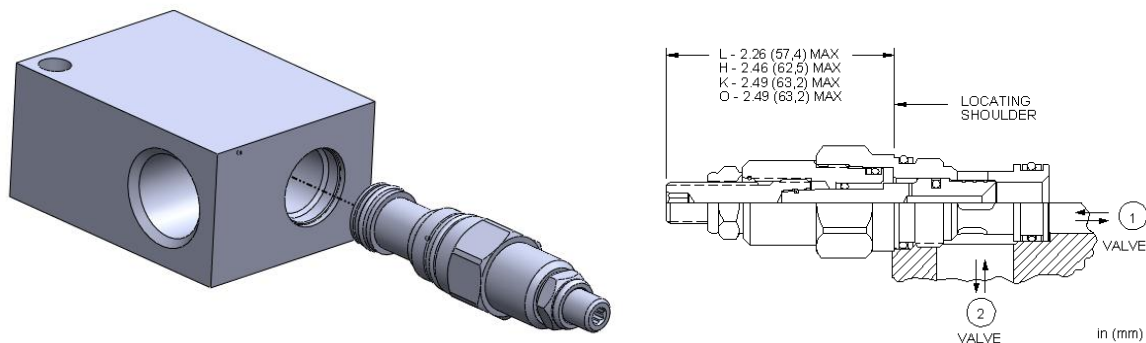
Sun Hydraulic NFCD needle valve and GAD/S manifold.
